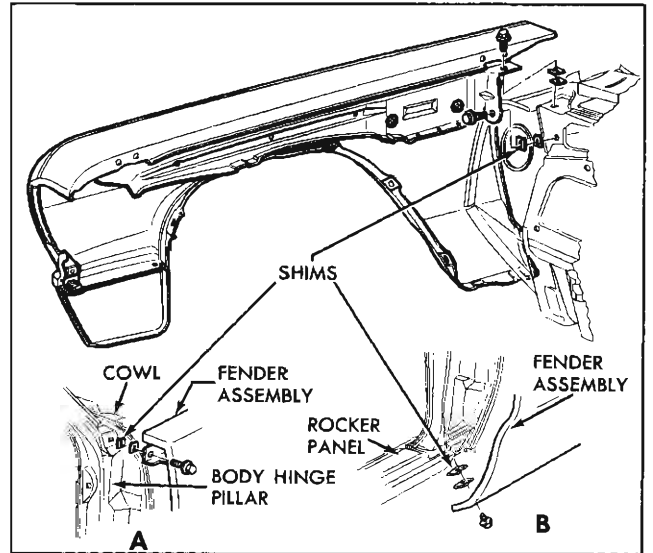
Fender to Cowl and Rocker Panel Shimming
